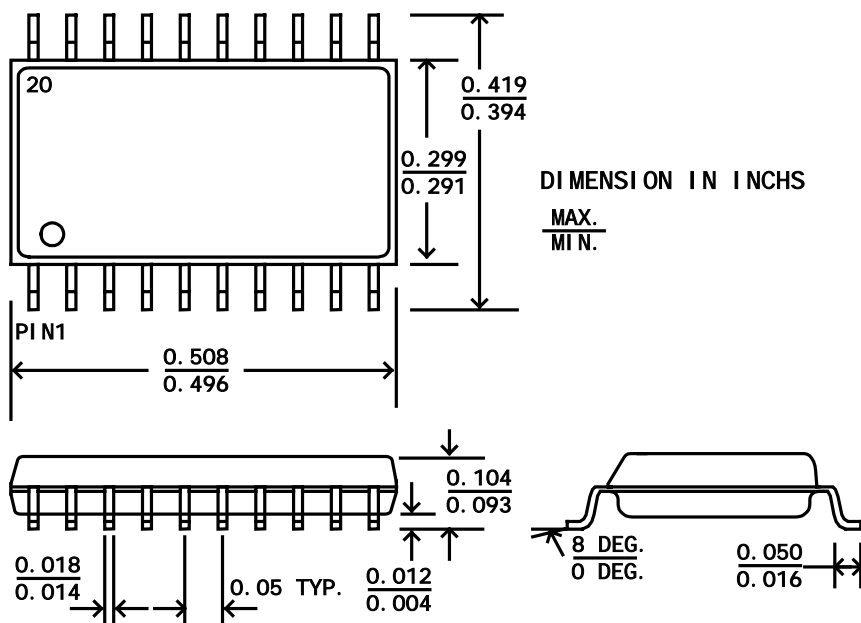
Package Outline Dimension for 20-Pin SOP
